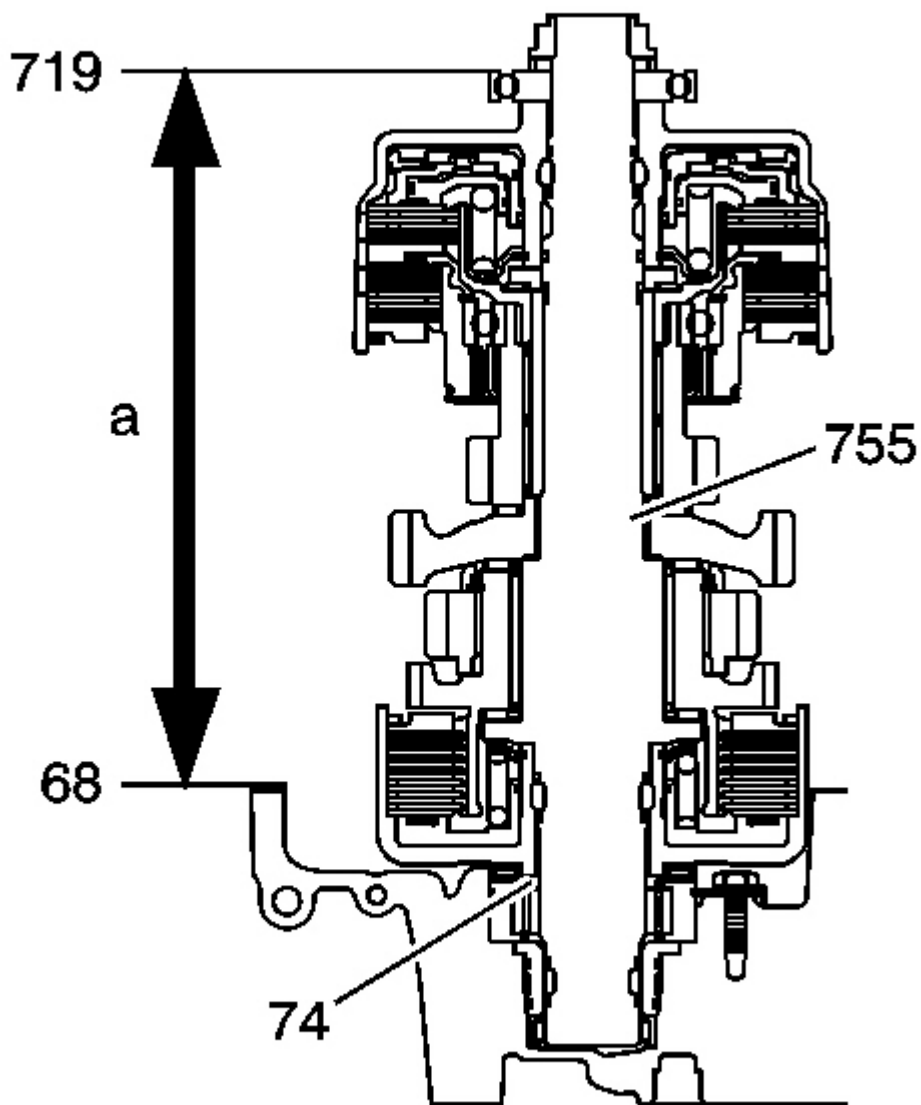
Measuring The Height Of 1st/2nd Clutch Shaft Assembly From Top Of Torque Converter
